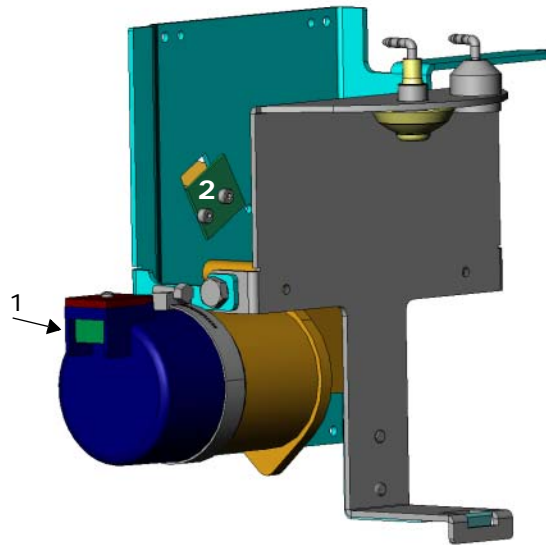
The dispensing module assembly (V44517), which includes also the pulse (1) and the zero sensor (2).
